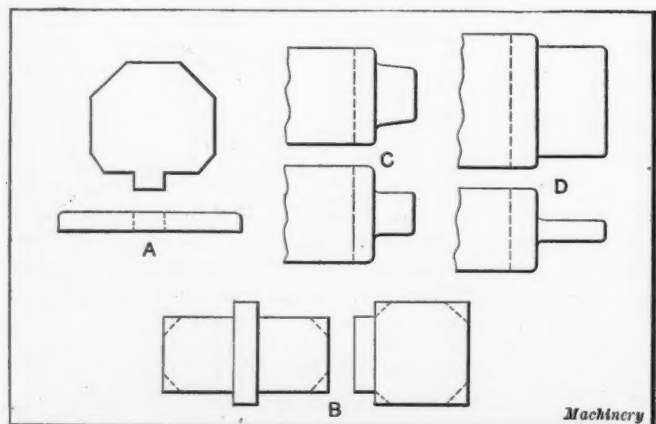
Stages in making Some of the Eye-plates shown in Fig. 56
